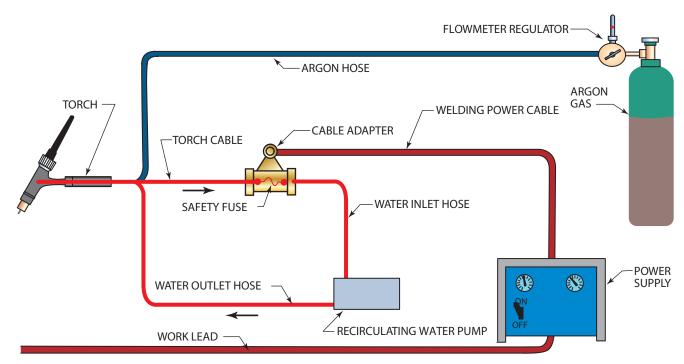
Schematic of a GTA welding setup with a water-cooled torch.
